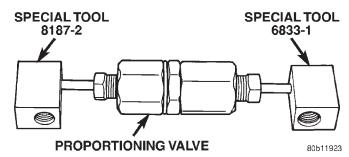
Pressure Test Fittings Installed On Proportioning Valve
